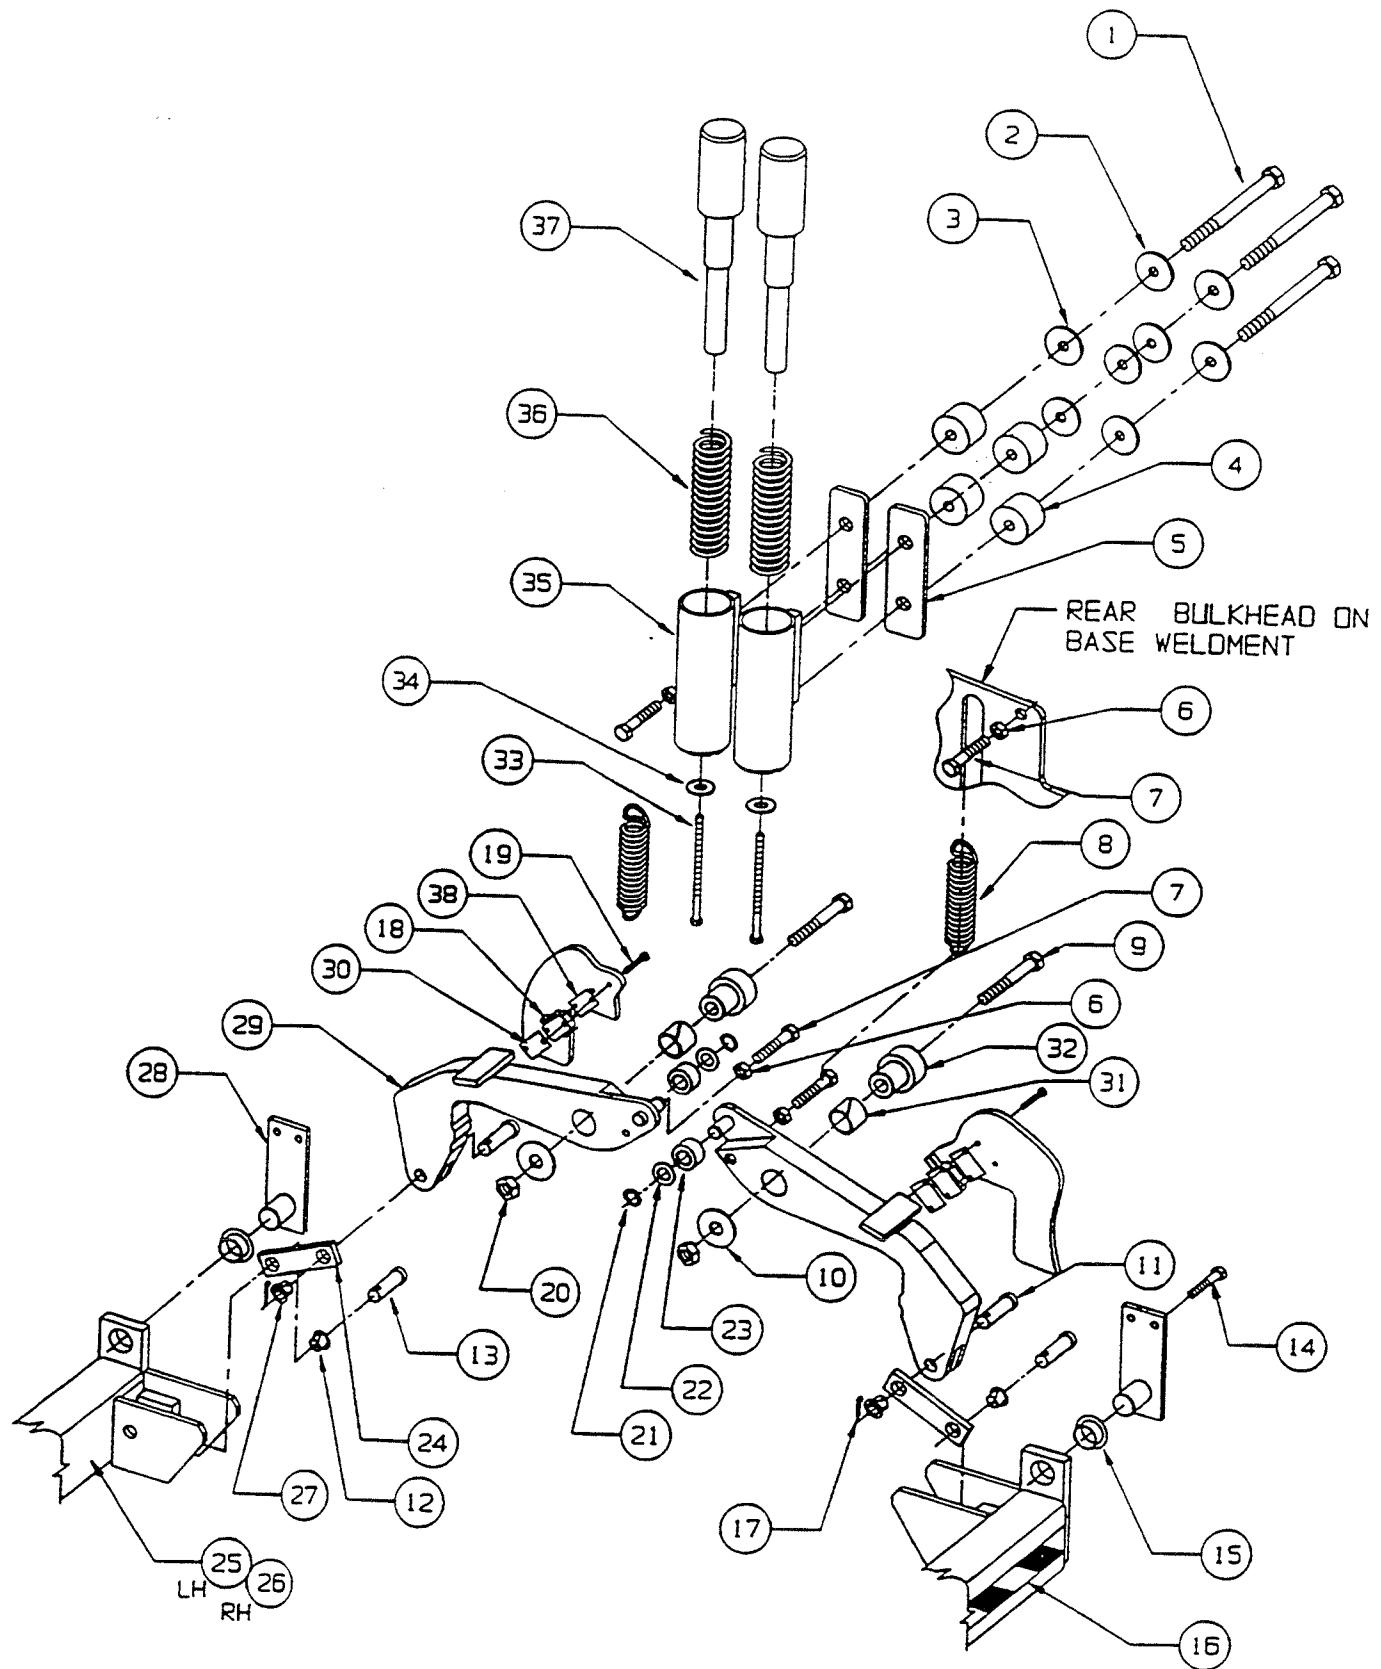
2033es Pothole Bar Mechanism Assembly
